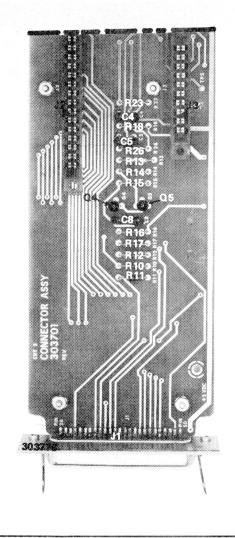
CONNECTOR ASSEMBLY PCB (A4200-4001)
